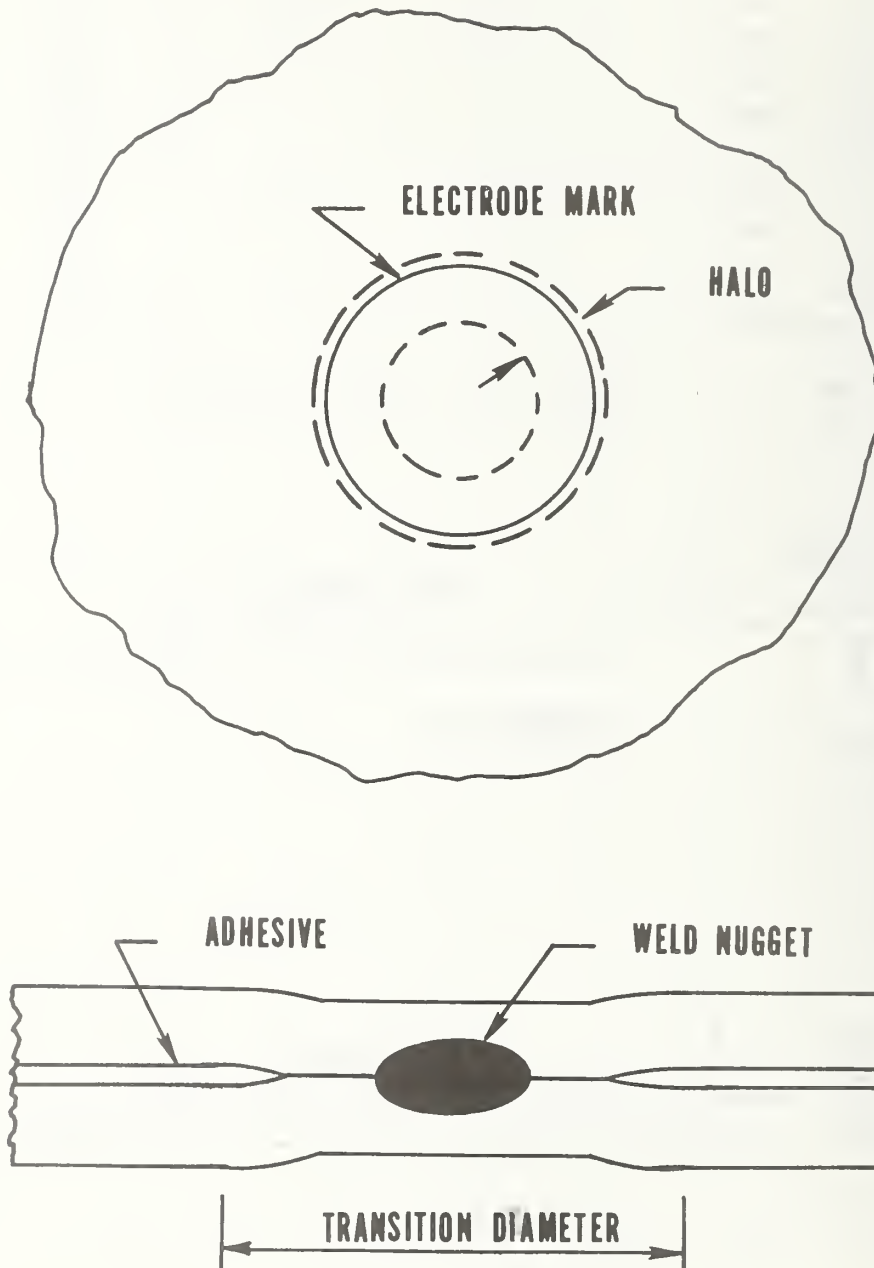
SCHEMATIC DESCRIPTION OF A SPOTWELD IN A SINGLE-LAP WELD-BONDED JOINT.
